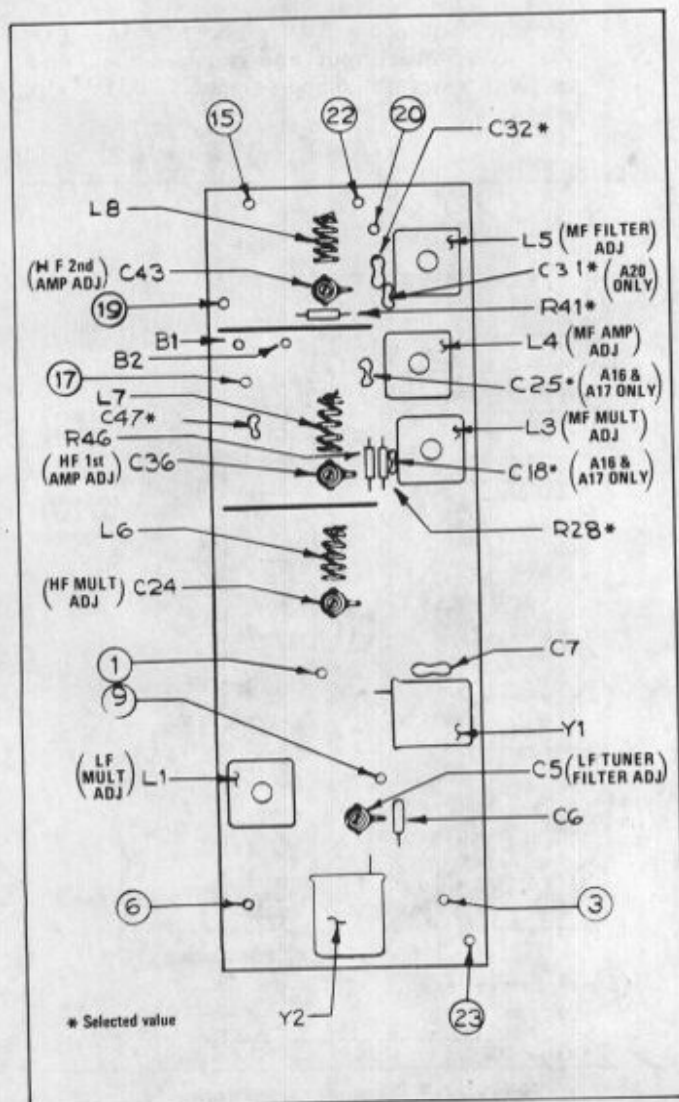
Trimmer Locations, Frequency Generator Assemblies, A16 thru A20
